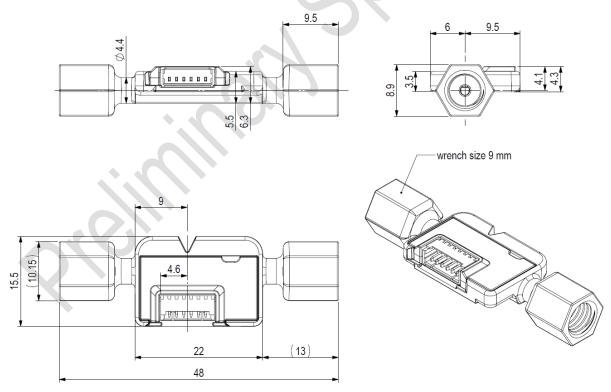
Dimensions of SLF3S-1300F (all dimensions in mm)
